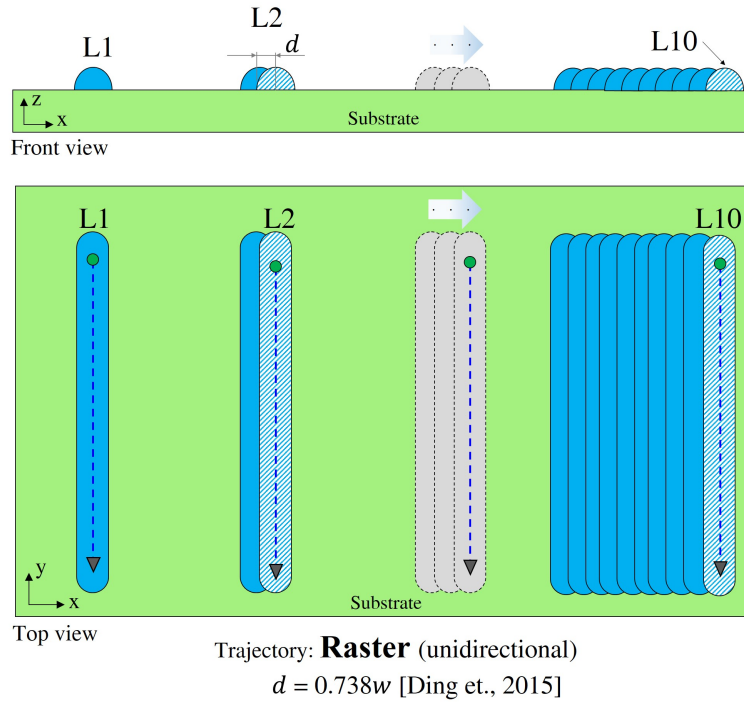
Trajectory of lateral overlap weld bead deposition
